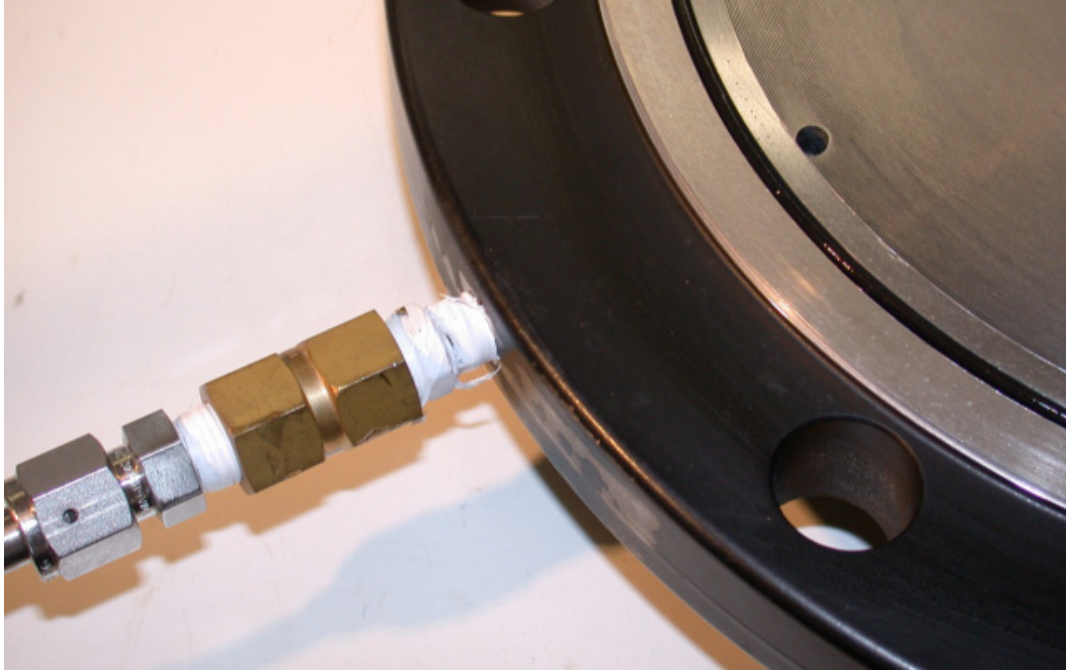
Close up of vacuum/resin port. Penetration into mold cavity is visible at right. Also visible are the O-ring and aluminum support rings.
